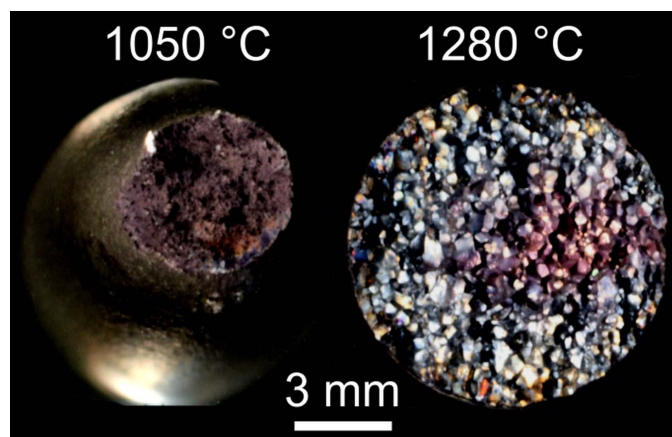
Examples of fracture surfaces after sample failure
